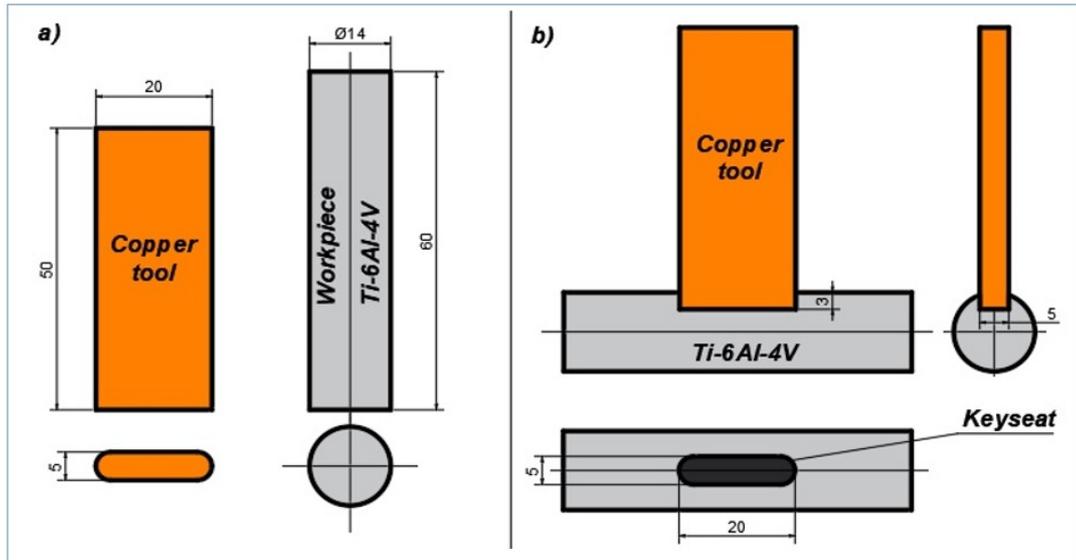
a) Dimensions of the workpiece and tool (electrode), b) processing principle and keyseat dimensions
